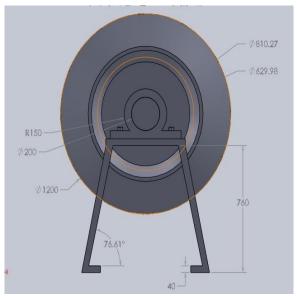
, Shaft, Impeller and Cushion Assembly (front view)
